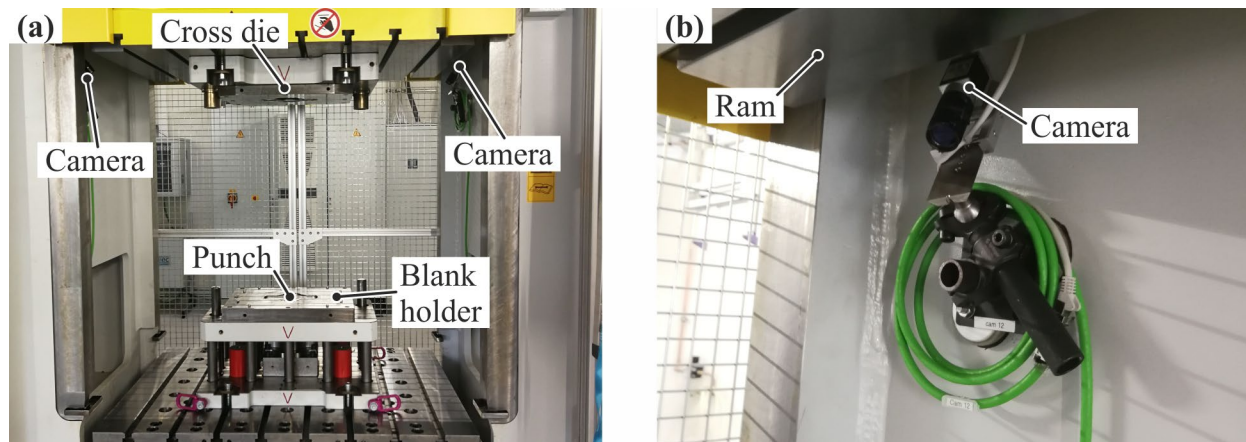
(a) Cross-die tool in the hydraulic press and (b) close-up of the camera on the right side
